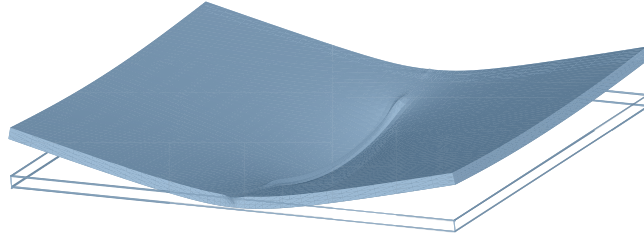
Final deformation of the butt welded piece. Exaggerated 30 times and measured after 300 seconds of cooling have passed since the welding procedure has finished.
